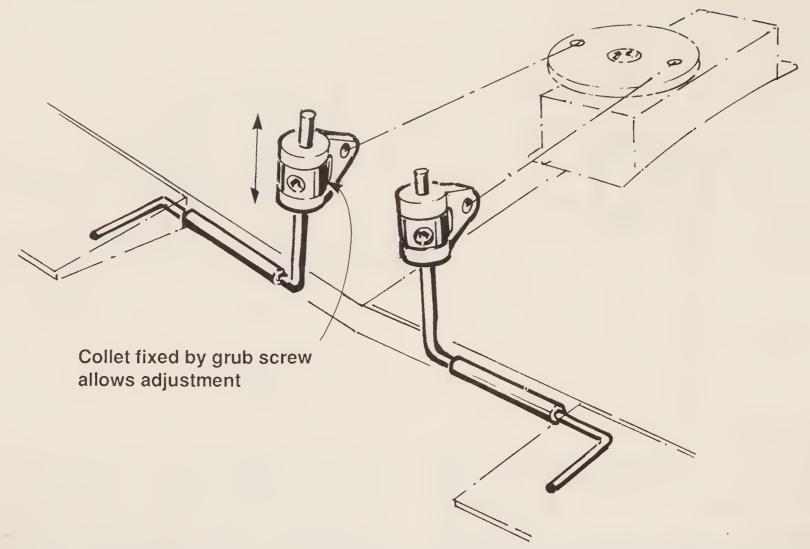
Strip aileron linkage is built in as the trailing edge is fixed. Torque tubes are fixed to wing.
